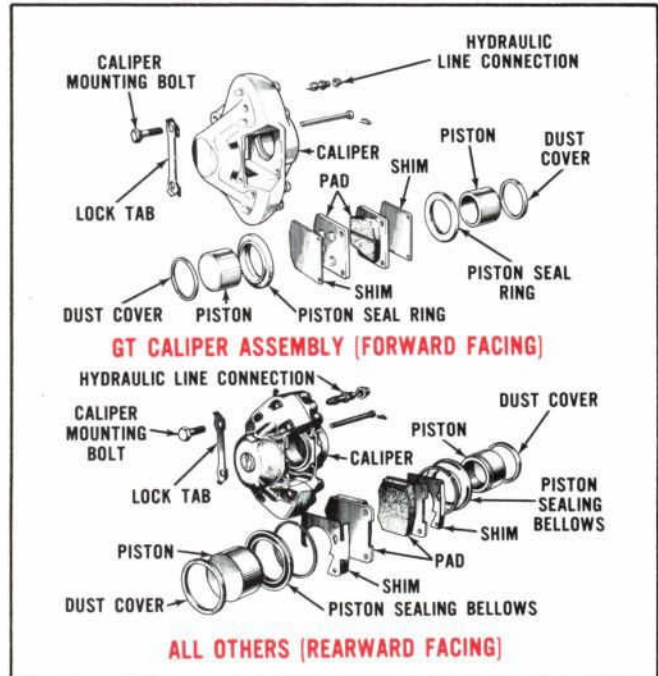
Exploded View—Cortina GT and Deluxe Calipers
